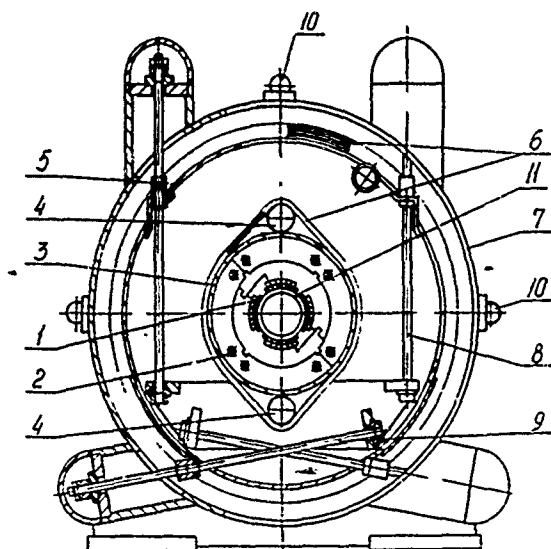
Cross sectional view of a SC quad assembled in a force-circulating cryostat: 1 - coil, 2 - magnet shield, 3 - helium vessel, 4 - two-phase helium pipe, 5 - thermal shield, 6 - superinsulation, 7 - vacuum shell, 8 - suspension, 9 - extension rod, 10 - geodetic marks, 11 - ion pipe.
